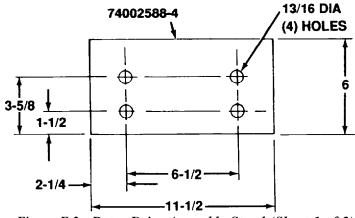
Rotor Drive Assembly Stand (Sheet 1 of 2)
